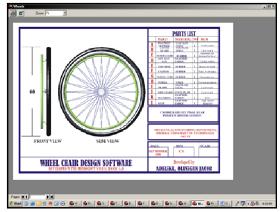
Wheel and Tyre of The Wheel Chair
